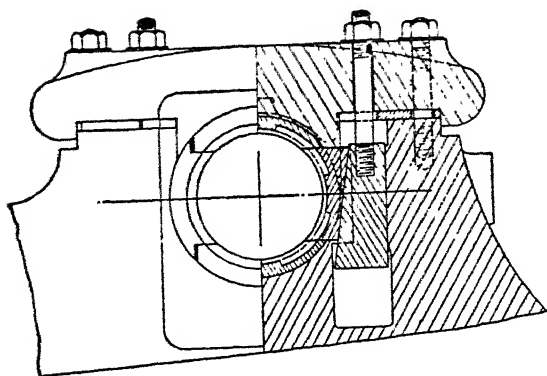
FOUR-PART BEARING IN HALF SECTION, SHOWING ADJUSTING WEDGE
